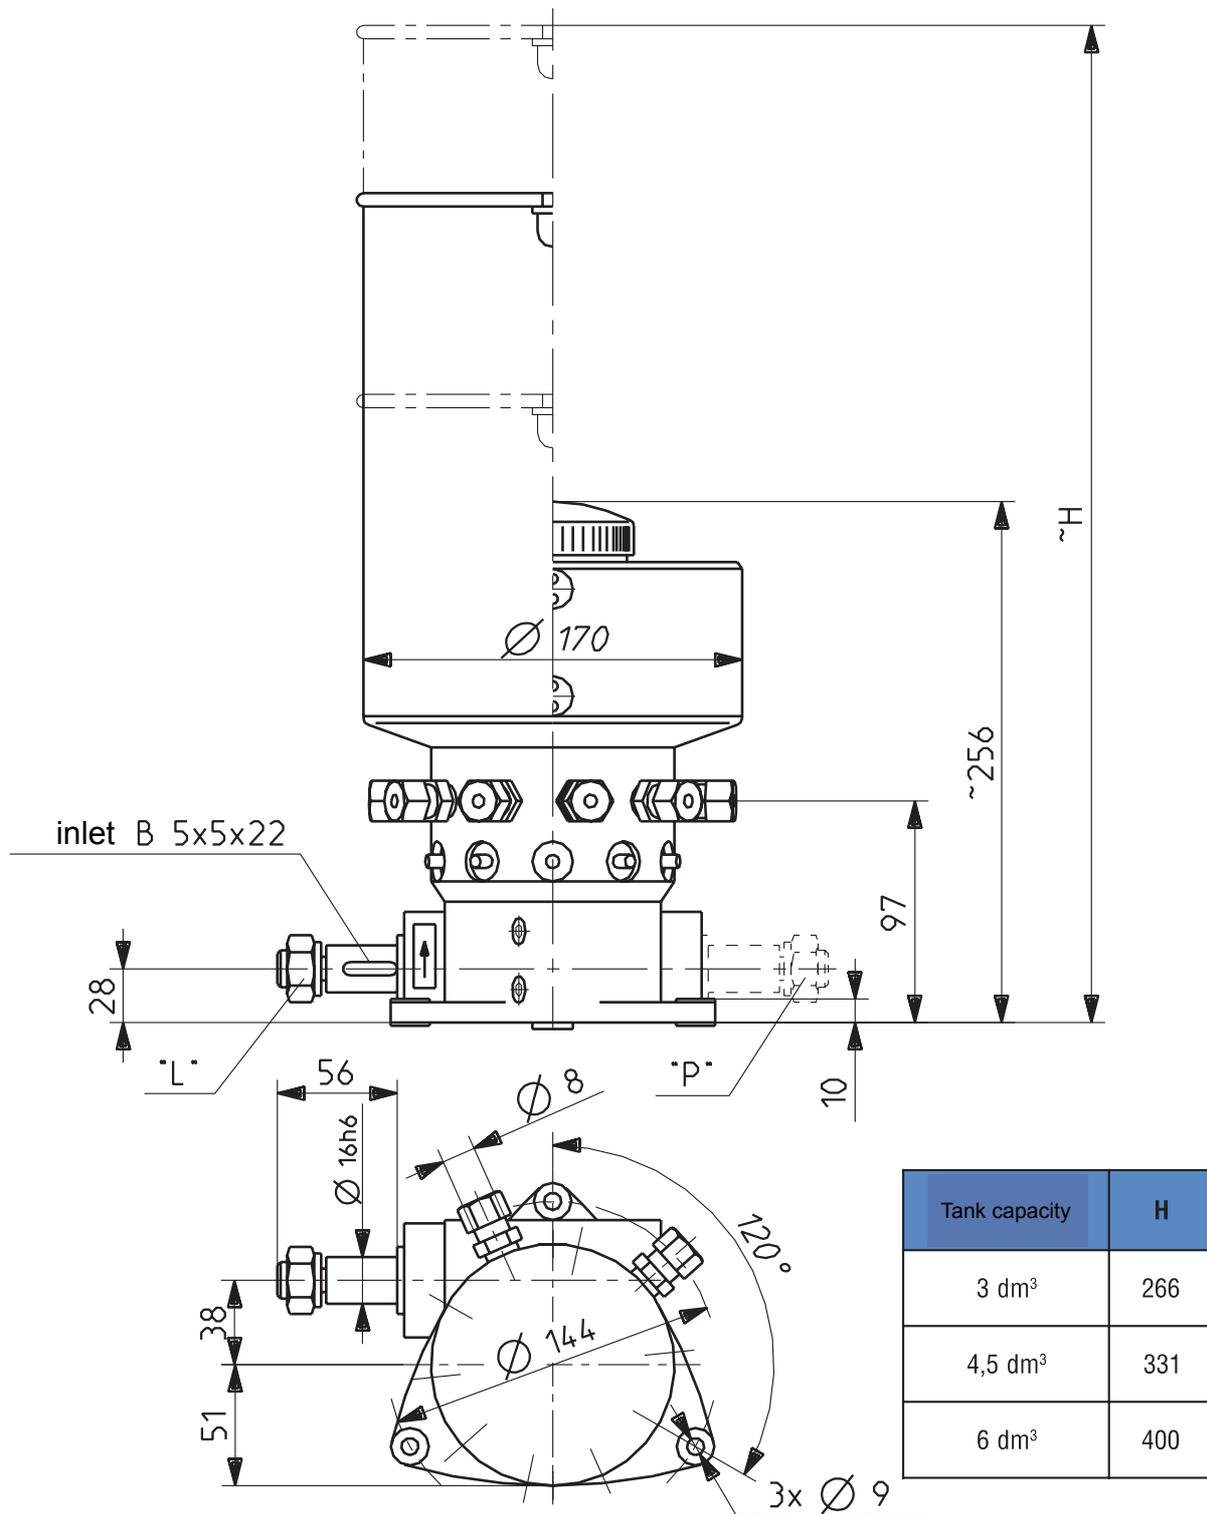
Grease and oil lubrication pump with rotary drive of MPS 10-B type
